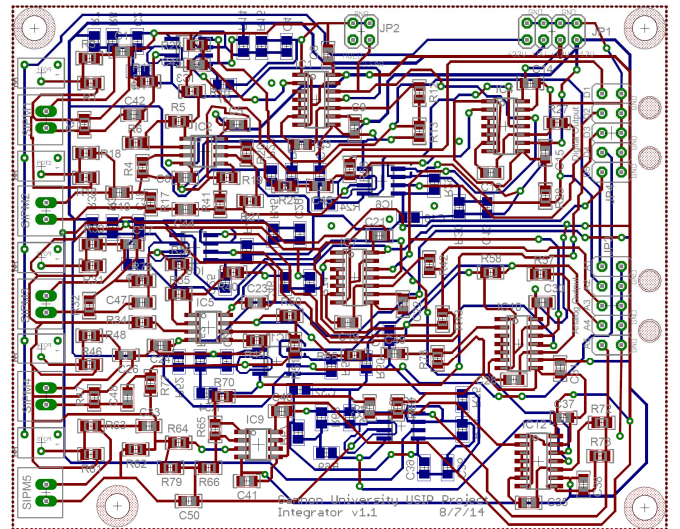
Student designed PCB layout of integrator board containing five SiPM readout channels.
